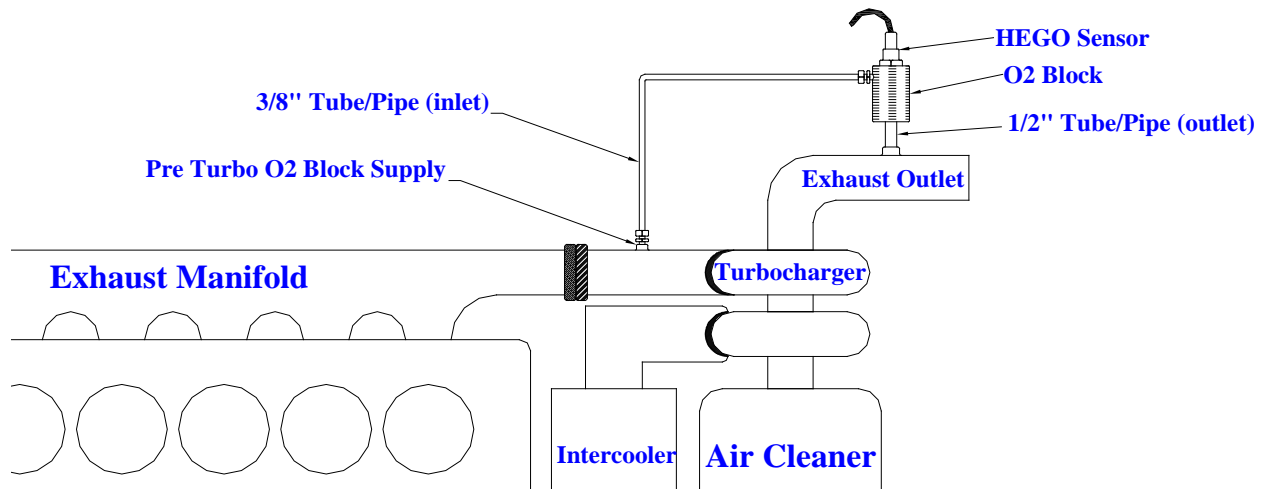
Proper HEGO Sensor Block Mounting for HEGO Sensor on a Turbocharged Engine
